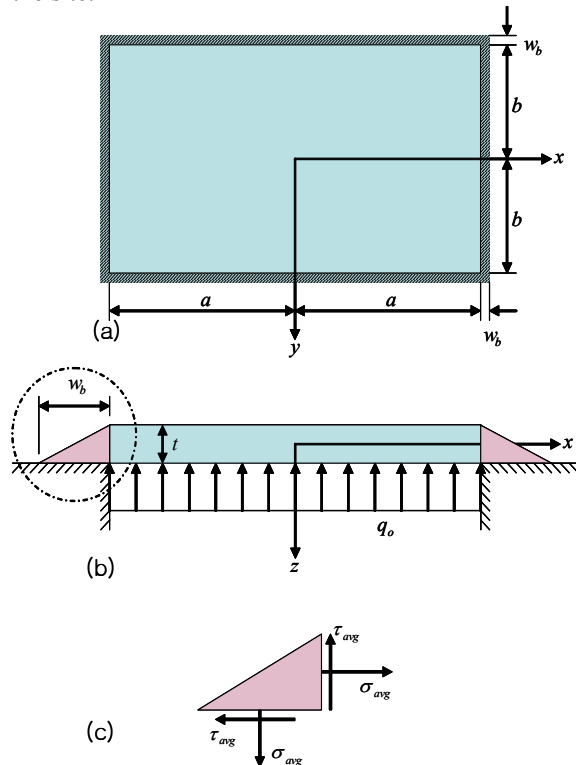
(a) Reinforcement Plate and welding Bead Geometries, (b) Load Acting on the Plate, (c) average stresses along the weldment
